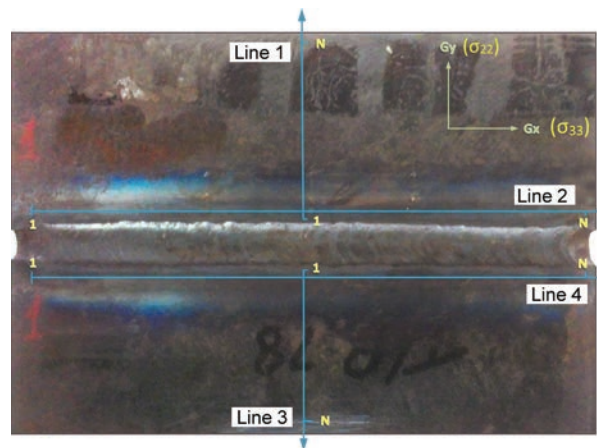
Welded sample (low carbon steel) with marked lines 1–4 indicating the locations of RS measurements
